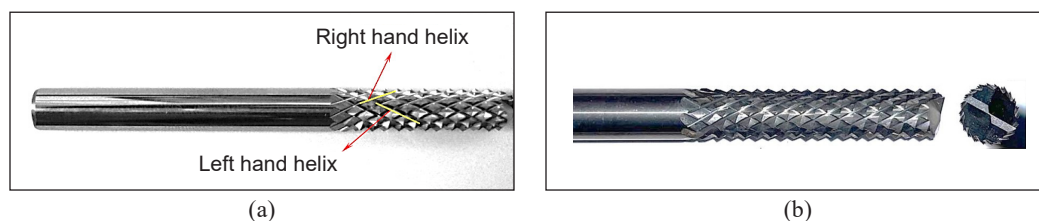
Geometry information for the burr or router tool; (a) geometric specifics; and (b) physical representation of the tool
